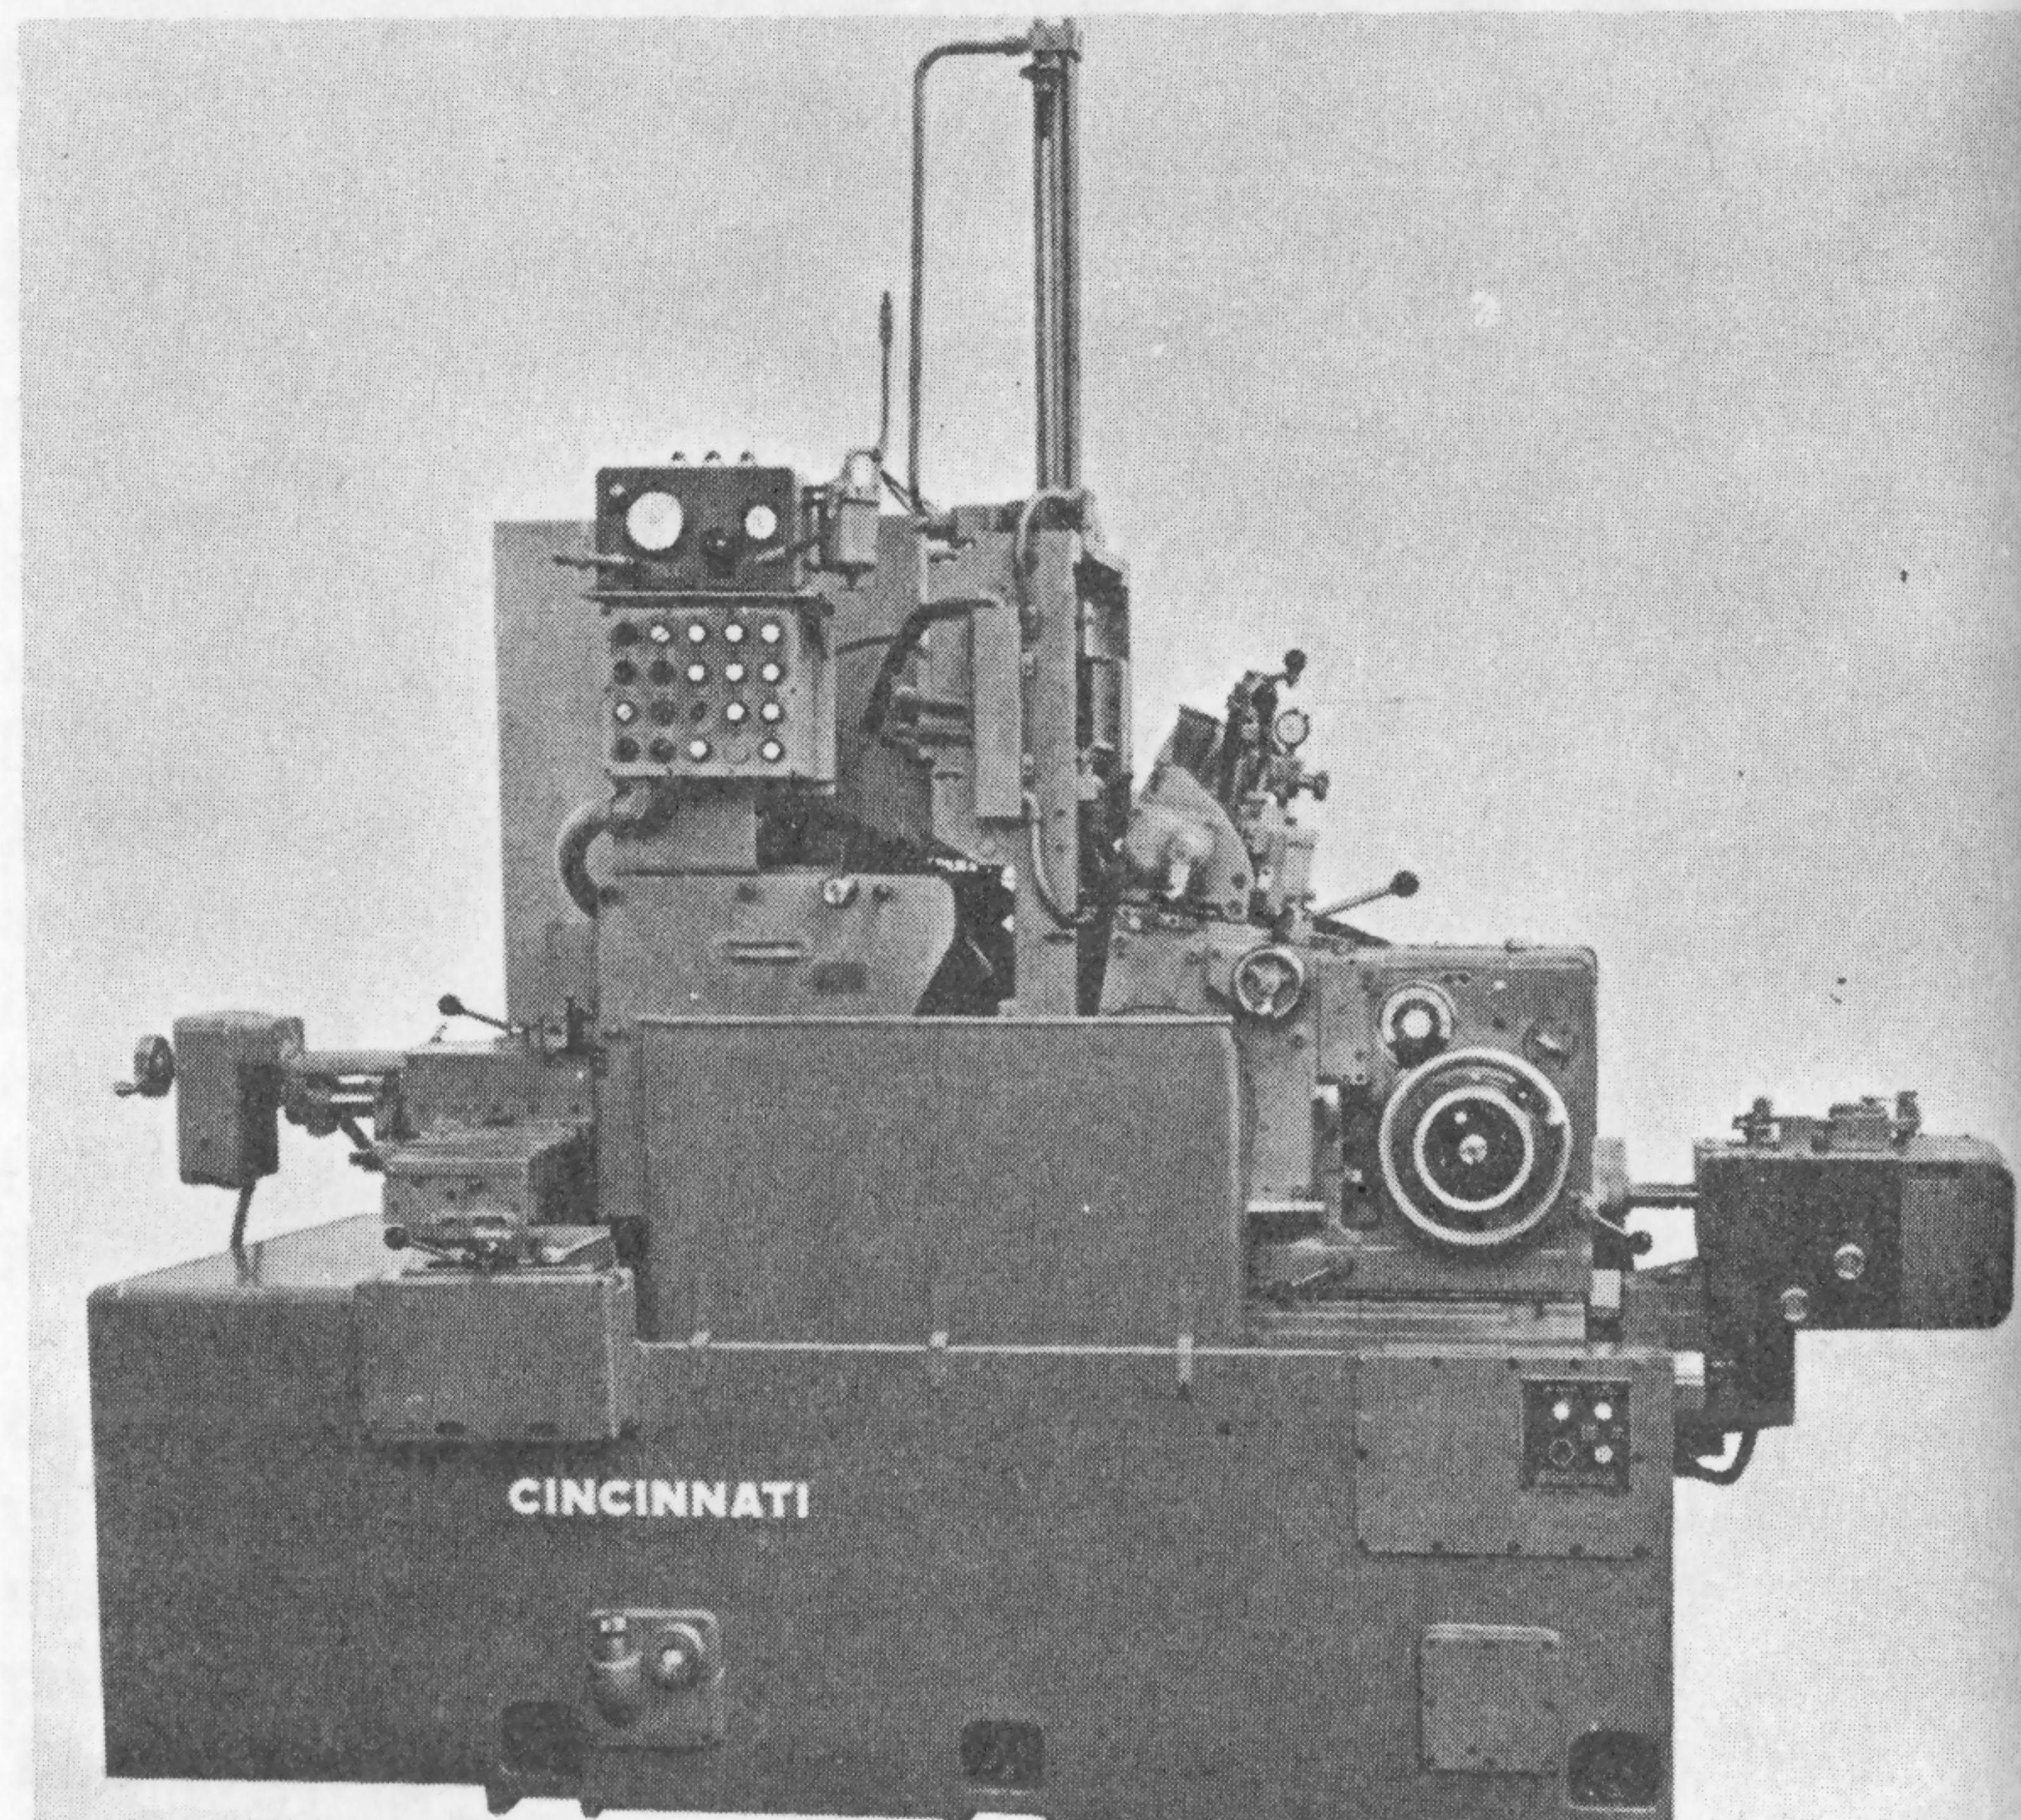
MODERN FULLY AUTOMATED CENTERLESS GRINDING MACHINE
